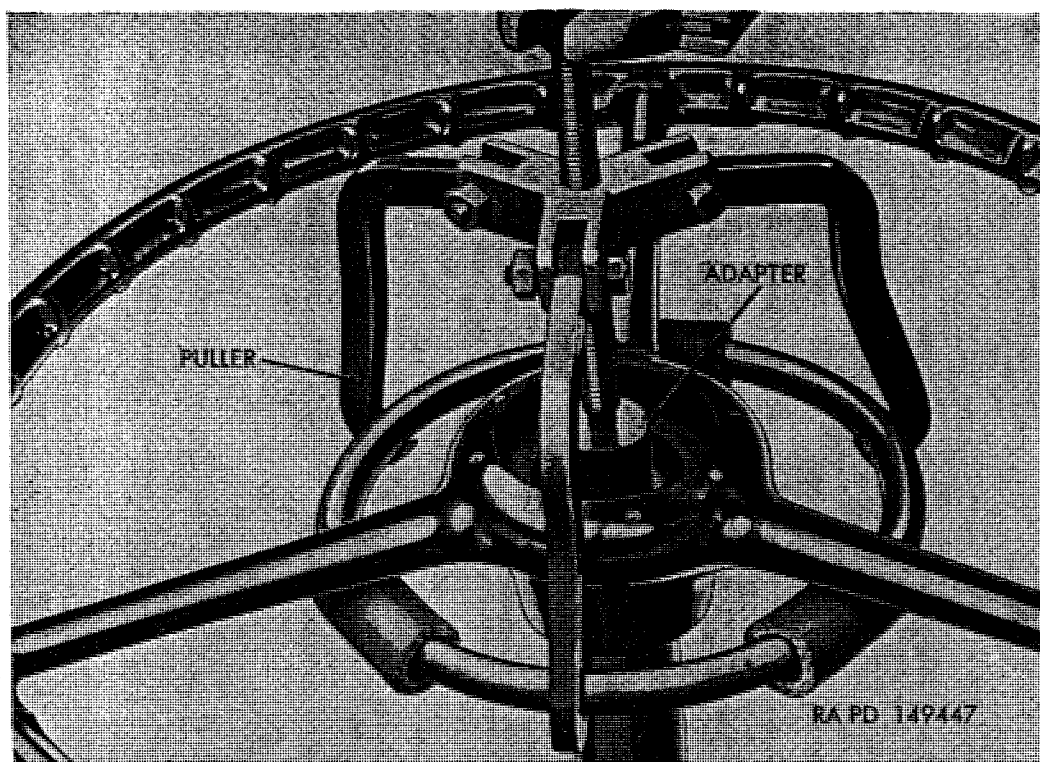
Removing steering wheel, using adapter A7950054 with puller.
